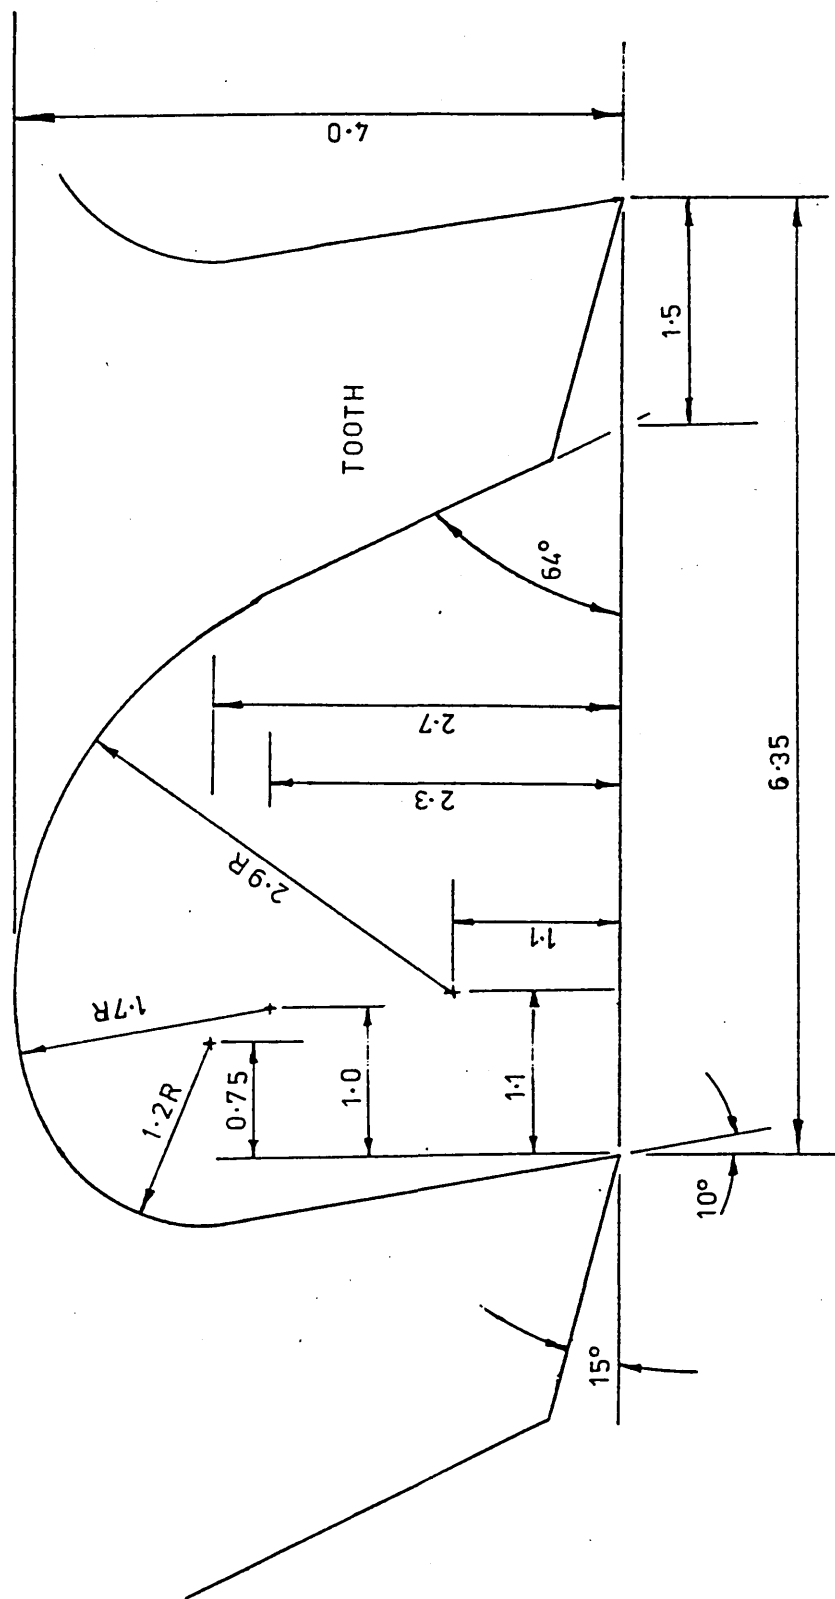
New Tooth/Gullet Design for Improved Chip Curl.
